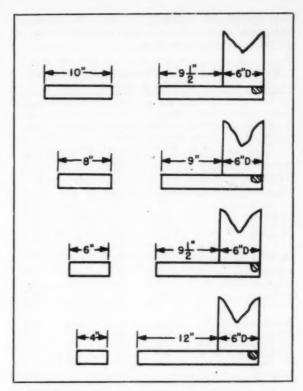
Longest 2-in. thick rectangular castings of 10, 8, 6 and 4-in. widths which can be made sound with a 6-in. diam riser.
